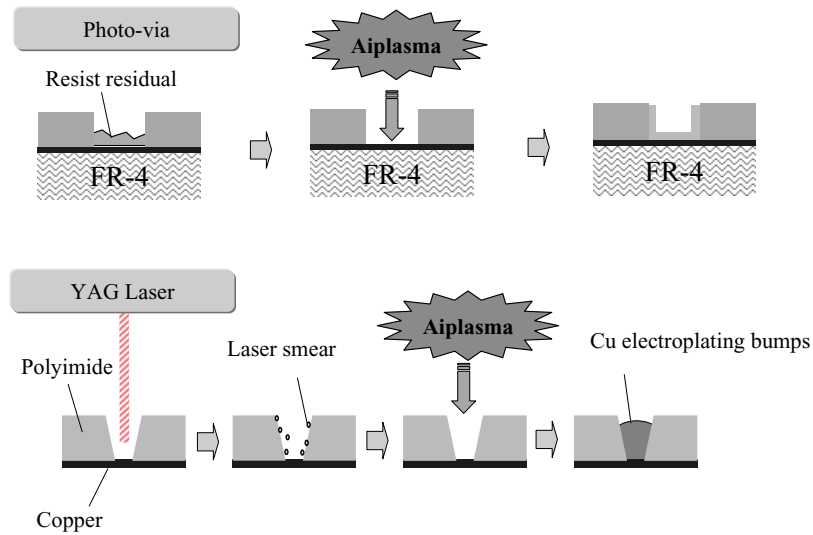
Application of *Aiplasma* to Printed Circuit Boards (PCB) fabrication.
